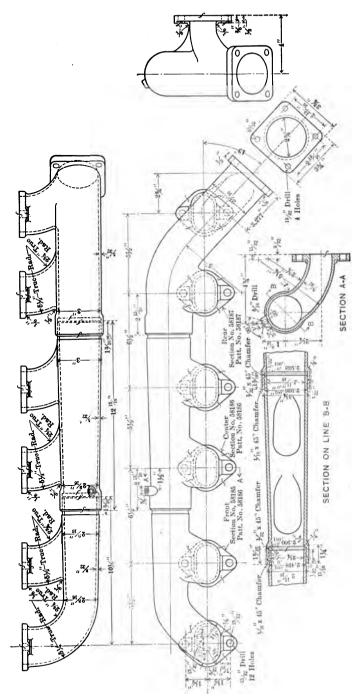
Exhaust manifold of twenty-four valve Pierce Arrow motor.
